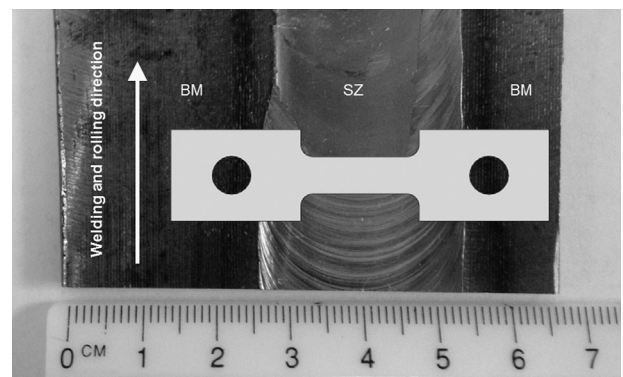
Tensile specimen geometry (gage section measurements: length=12.7 mm, width=5.08 mm, and thickness=1.09 mm) with corresponding location with respect to welded plate. Stir zone (SZ) annotated as the center of the weld pass and base metal (BM) annotated on each side of the weld pass.
